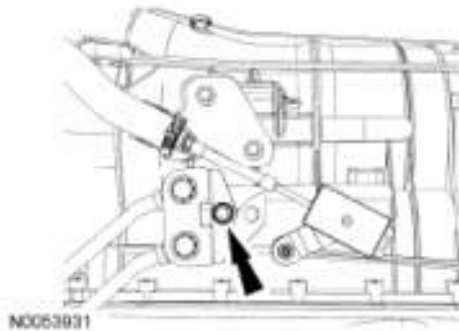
Identifying Outer Shell Of Transmission Vehicle Harness Connector
